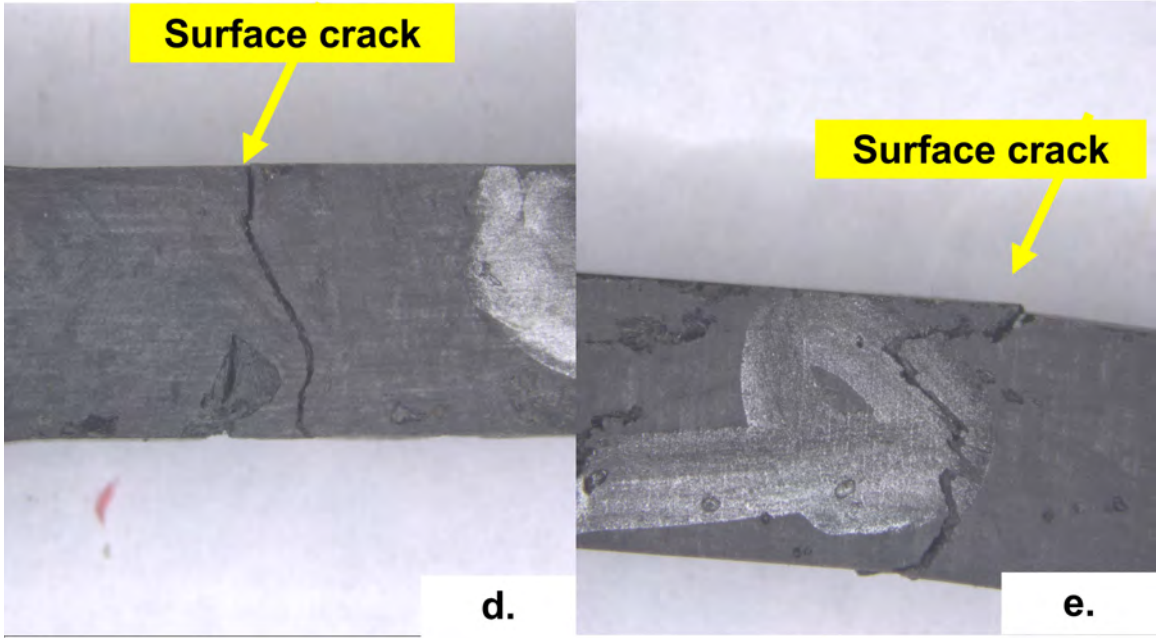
Epoxy Specimens Batch 5 (10% CF): d) Epoxy-CF 9 crack - 474K e) Epoxy-CF 10 crack - 474K
